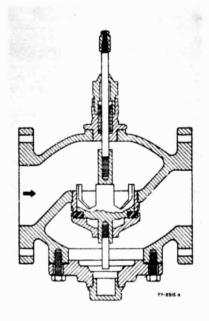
FLANGED, CAST IRON, REVERSE ACTING, 125 PSI (1035 kPa) VALVE BODY 4 THRU 6 IN. (THE 250 PSI [1725 kPa] VALVES HAVE RAISED FACE RING)
